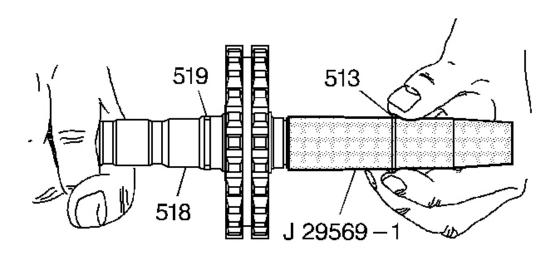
View Of Turbine Drive Sprocket & Retaining Ring Courtesy of GENERAL MOTORS CORP.
